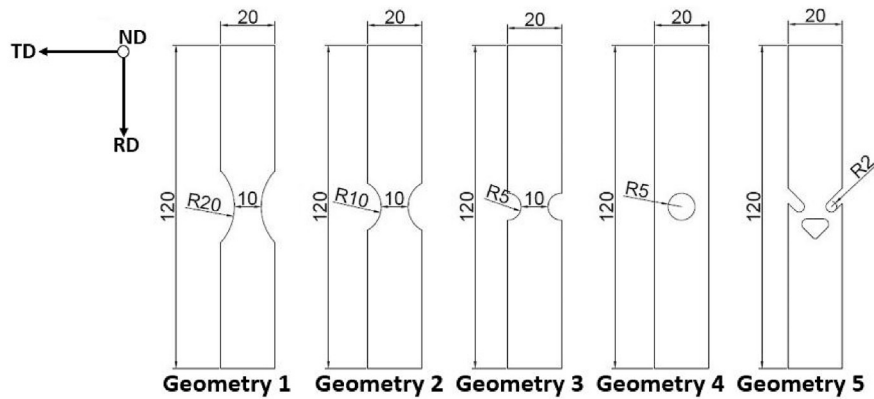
Specimen dimensions for tensile testing (unit: mm).
